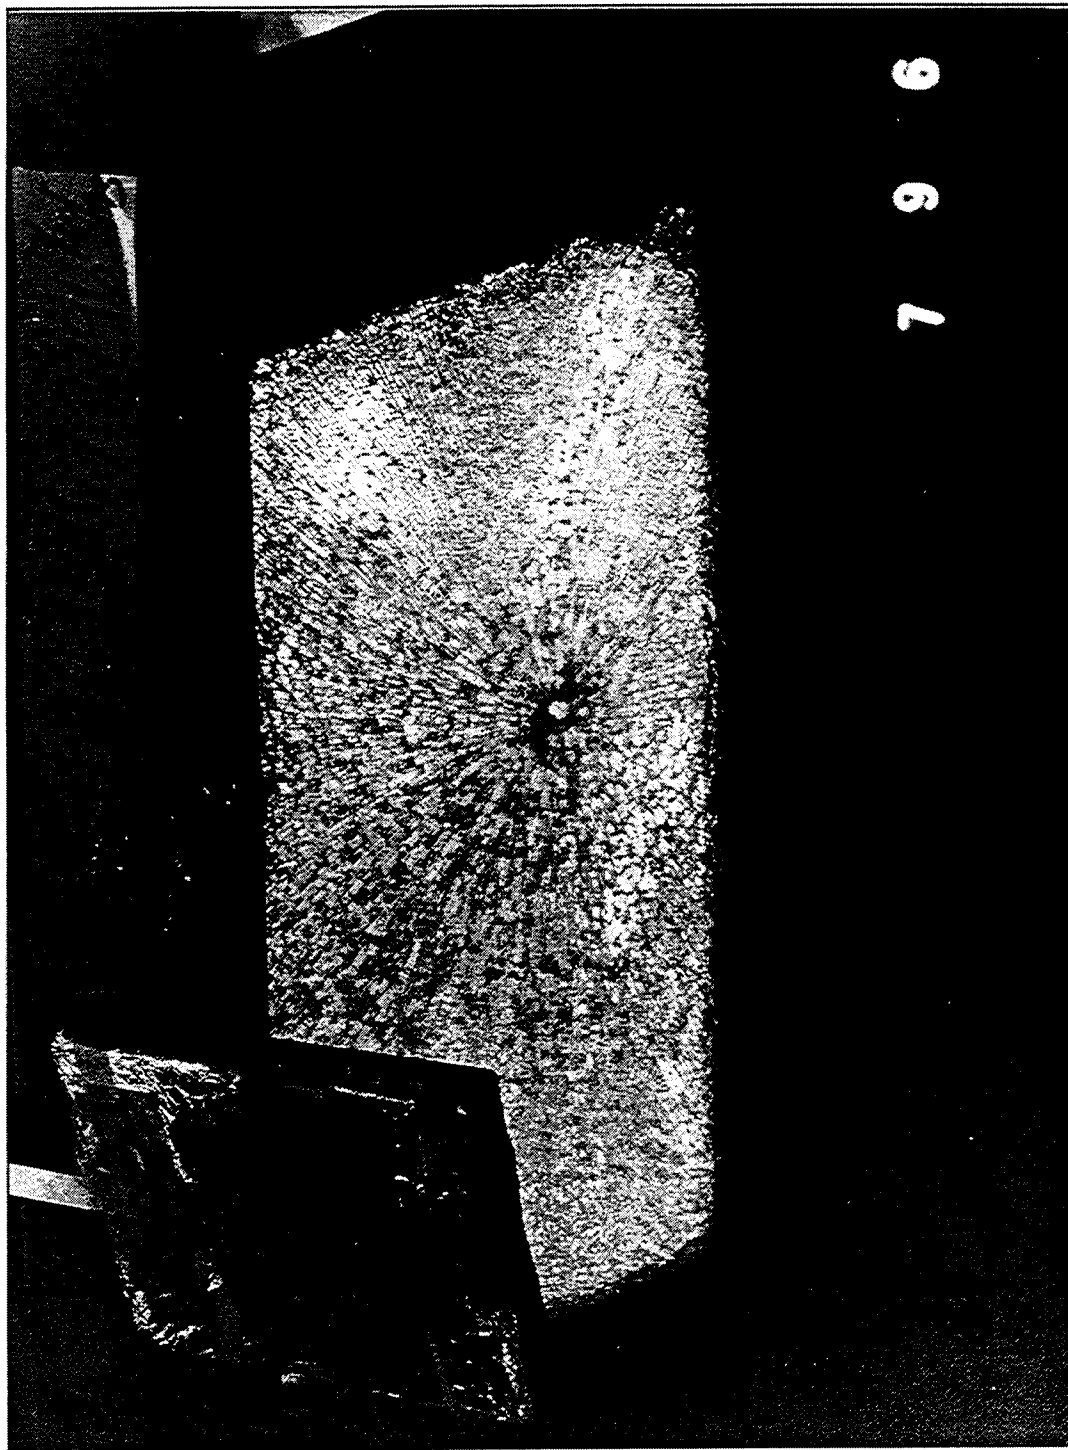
C/KC-135 #1 W/WS Showing All Glass Plies Failed From a 4-Pound Bird Impact at 249.4 Knots, Rear View
